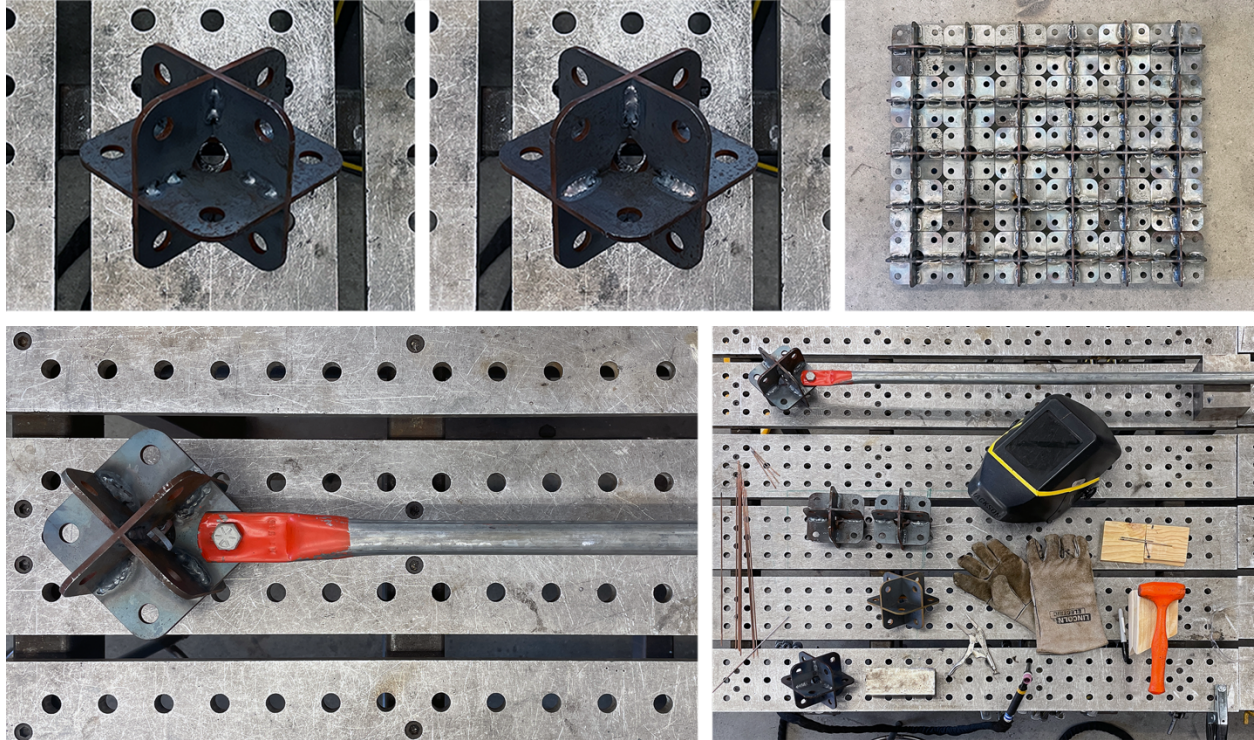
Process to welded joints (L - R). Tacked corner. Bead welded corner. 30 units of joints. Test fit onto strut. Welding set-up and equipment.
